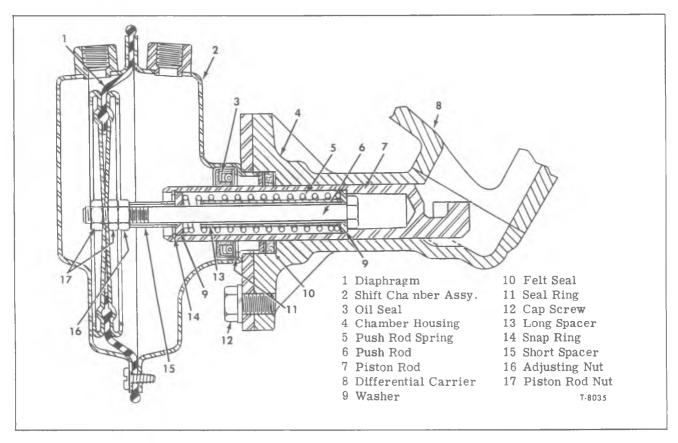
Sectional View of Two-Speed Axle Vacuum Shift Chamber (Corporation Axle)
